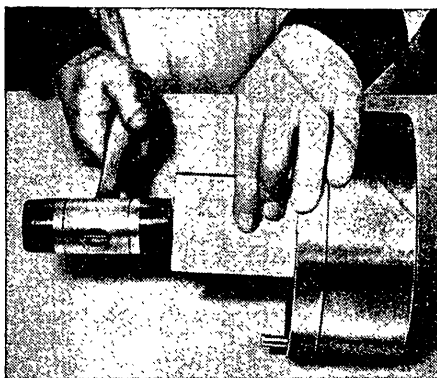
Remove clutch drum retainer ring. Then separate drums by tapping lightly on clutch drum rear thrust face, being careful not to damage the composition clutch plates
